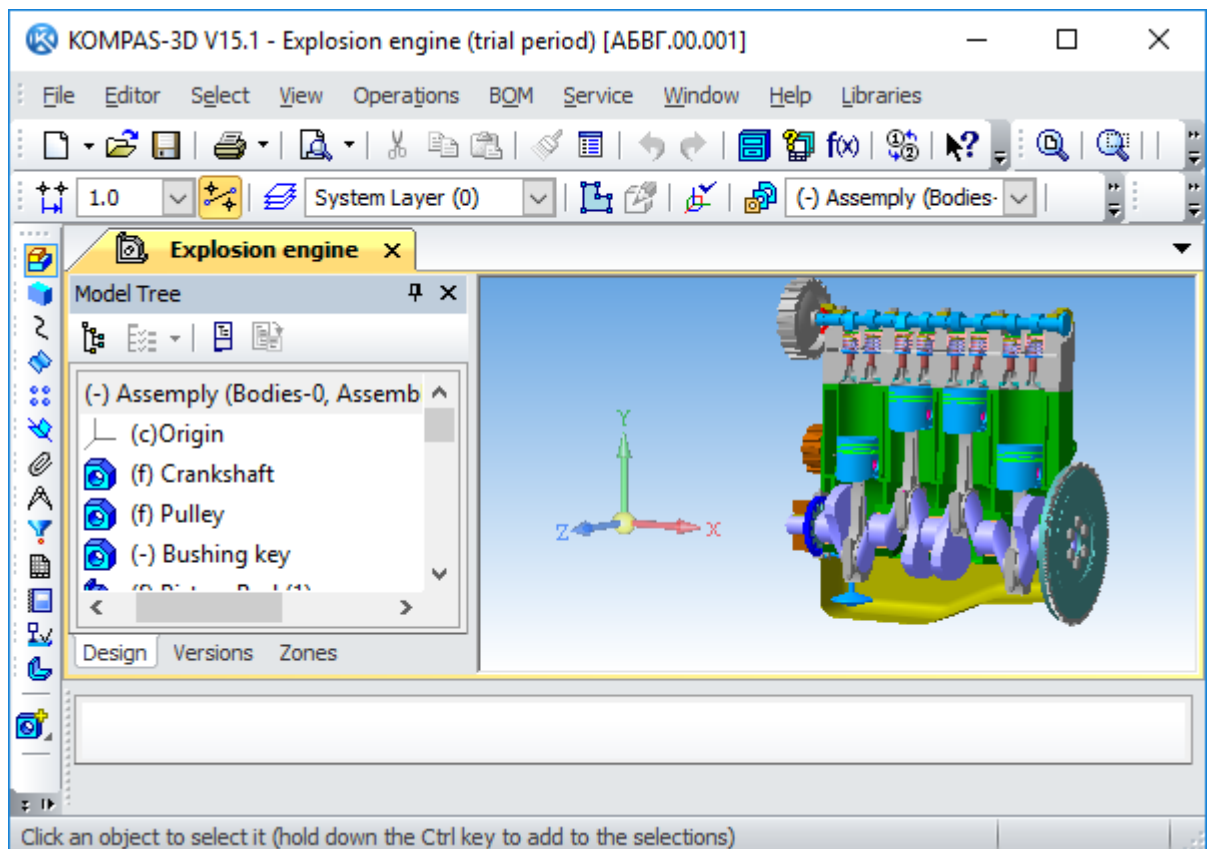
"Explosion engine.a3d" assembly in KOMPAS-3D
